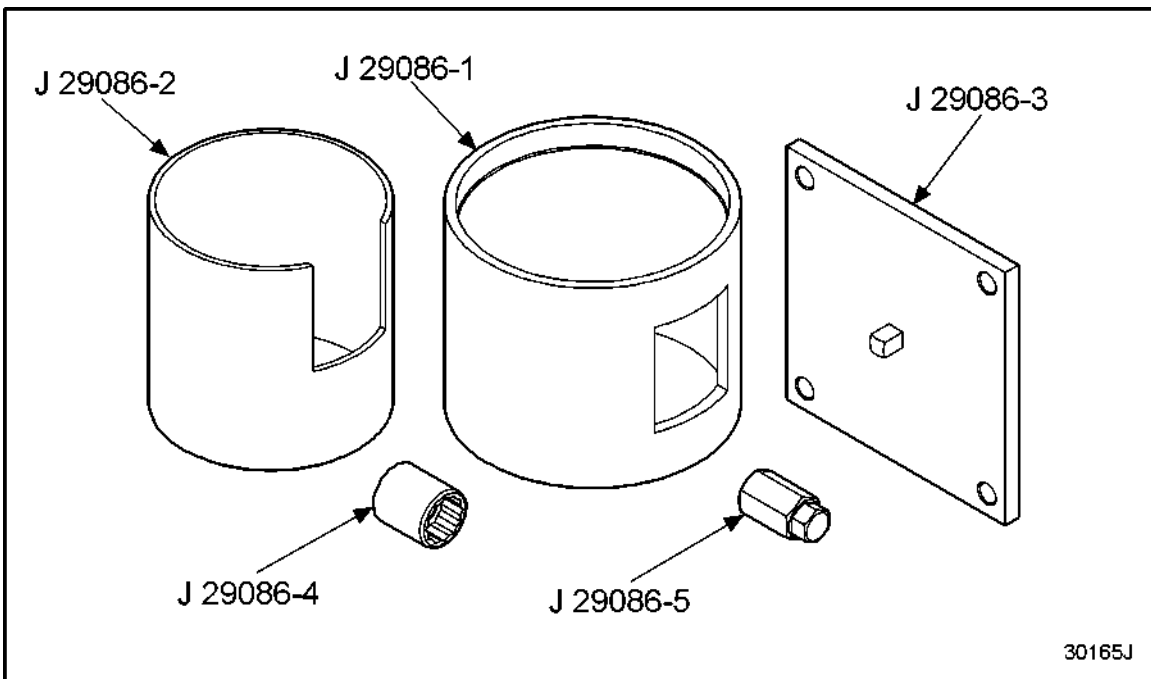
Series 60 (14L) Turbocharger Support Fixture, J 29086
